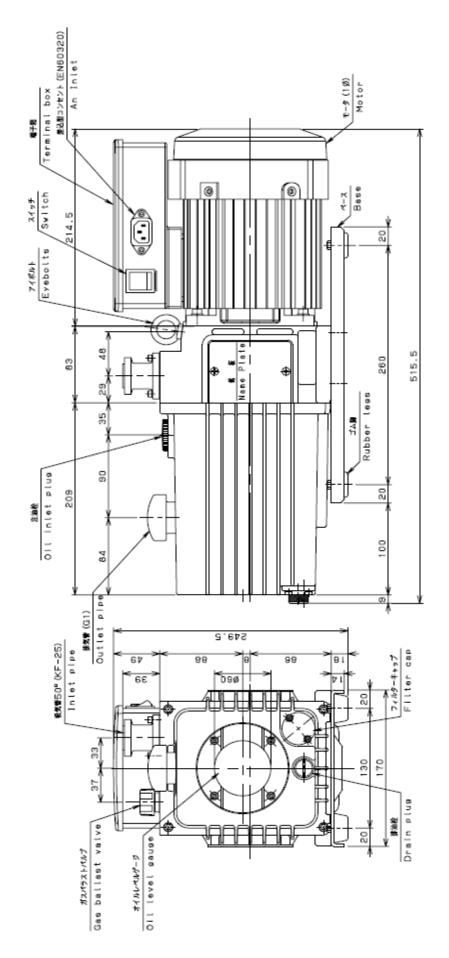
Dimensional drawing of GLD-202BB oil sealed rotary vacuum pump
